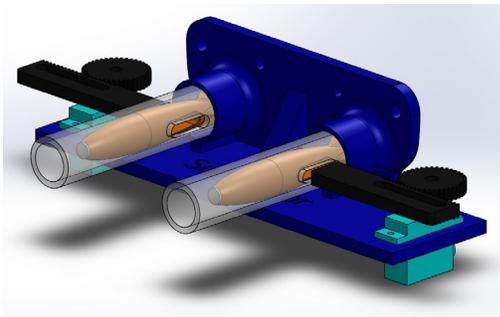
Servo-actuated torpedo launchers. The frame is 3D printed from PETG and waterproof, the rack and pinion assembly are HDPE for low friction, and the tubes are polycarbonate for visibility.
